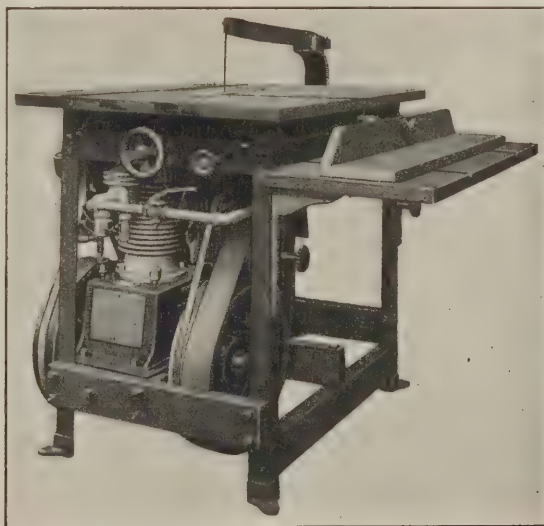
The Machine as a Jig Saw with Boring Attachment.
